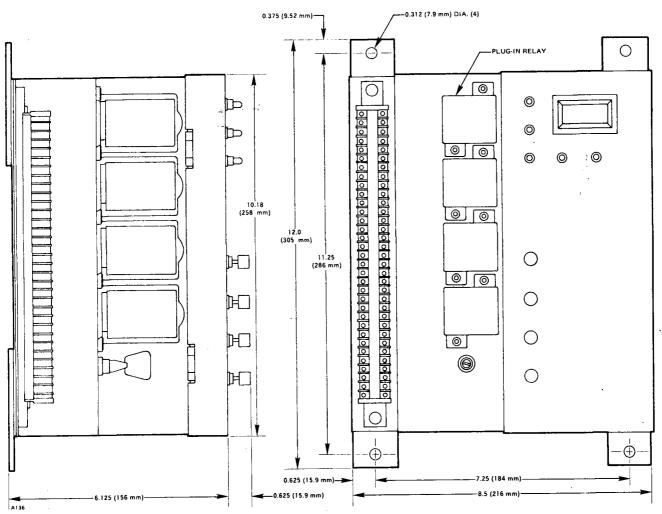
Dimensions of the R7303 Controller in Inches (and millimeters).
